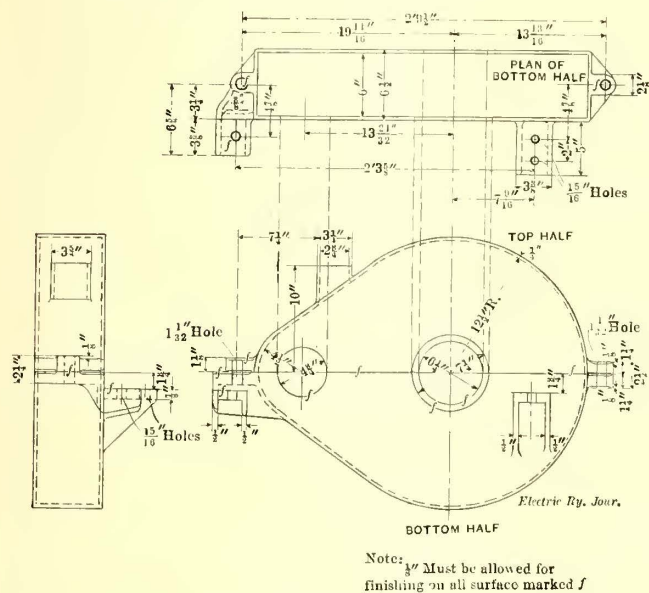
Brooklyn Power Equipment—Malleable Iron Gear Case for Westinghouse 68 Motor
